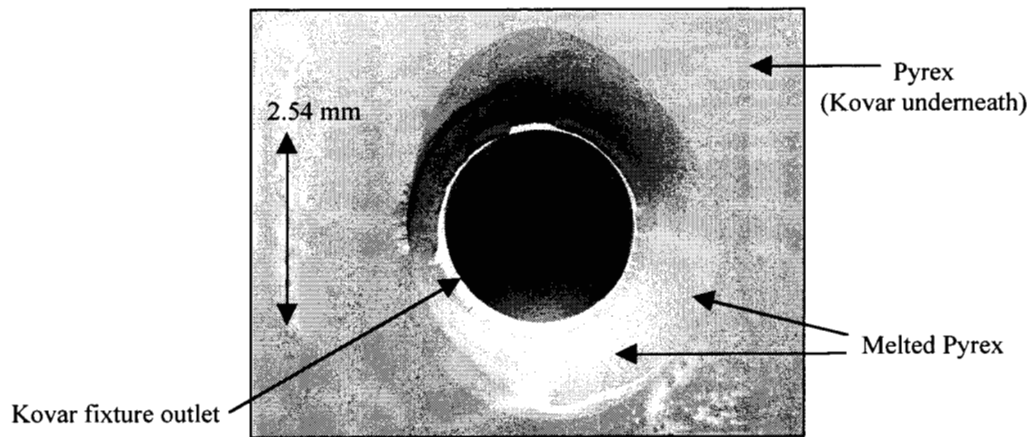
Close-up view of the Kovar fixture outlet on a burst tested Pyrex sample.
